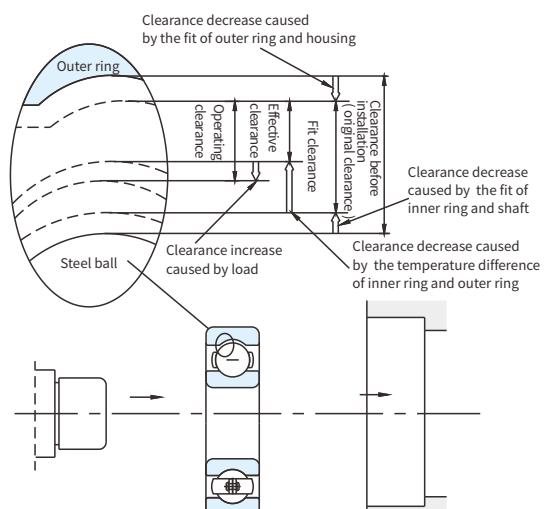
Sketch of single row deep groove ball bearing clearance
